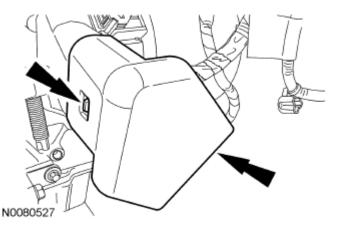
Locating Locking Tab And Generator Air Duct Courtesy of FORD MOTOR CO.
